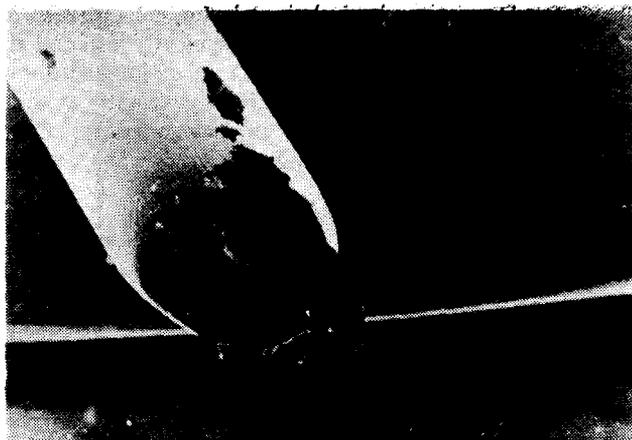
The fracture surface of stainless-steel wire that had been submitted to the modified boiling magnesium chloride test, showing longitudinal pits in the wire, which may have led to premature fracture ( $\times 38$ )
